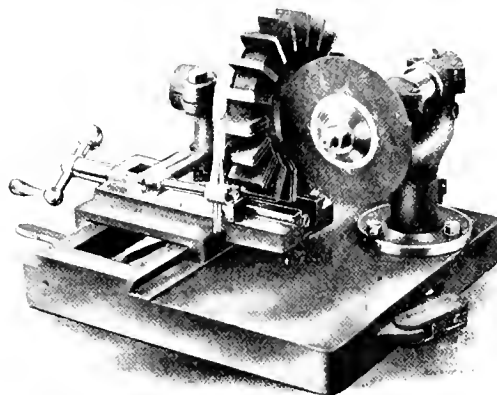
Sharpening the Face of an Inserted Tooth Cutter.
